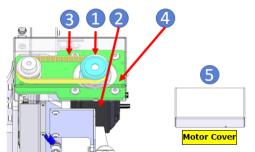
Z-Axis Assembly Using Higher Torque Motor
